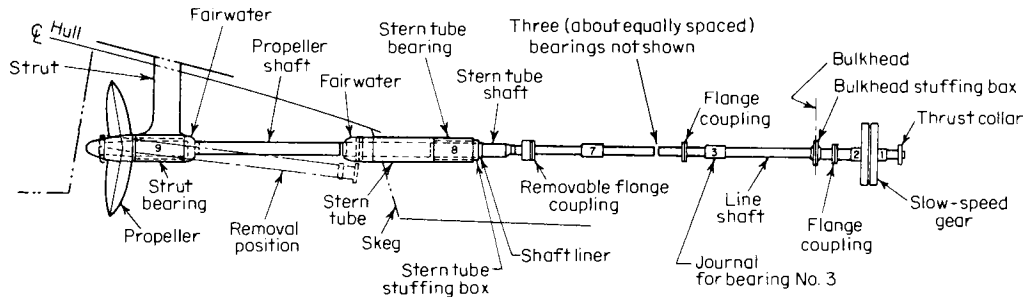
Shafting arrangement with strut bearings. (From "Marine Engineering," SNAME, 1992.)
